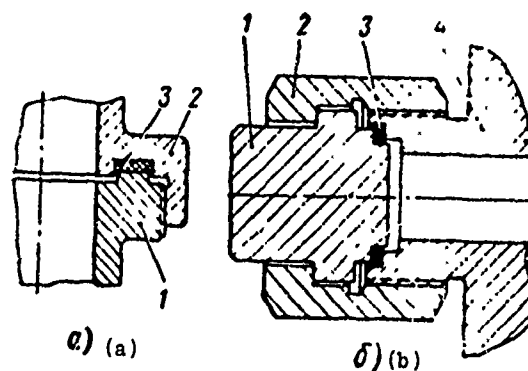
Seal of the gasket using a threaded connection: a - thread on both sealed parts; b - thread only on one seal part; 1 - nipple; 2 - nut; 3 - gasket; 4 - connector fitting.
